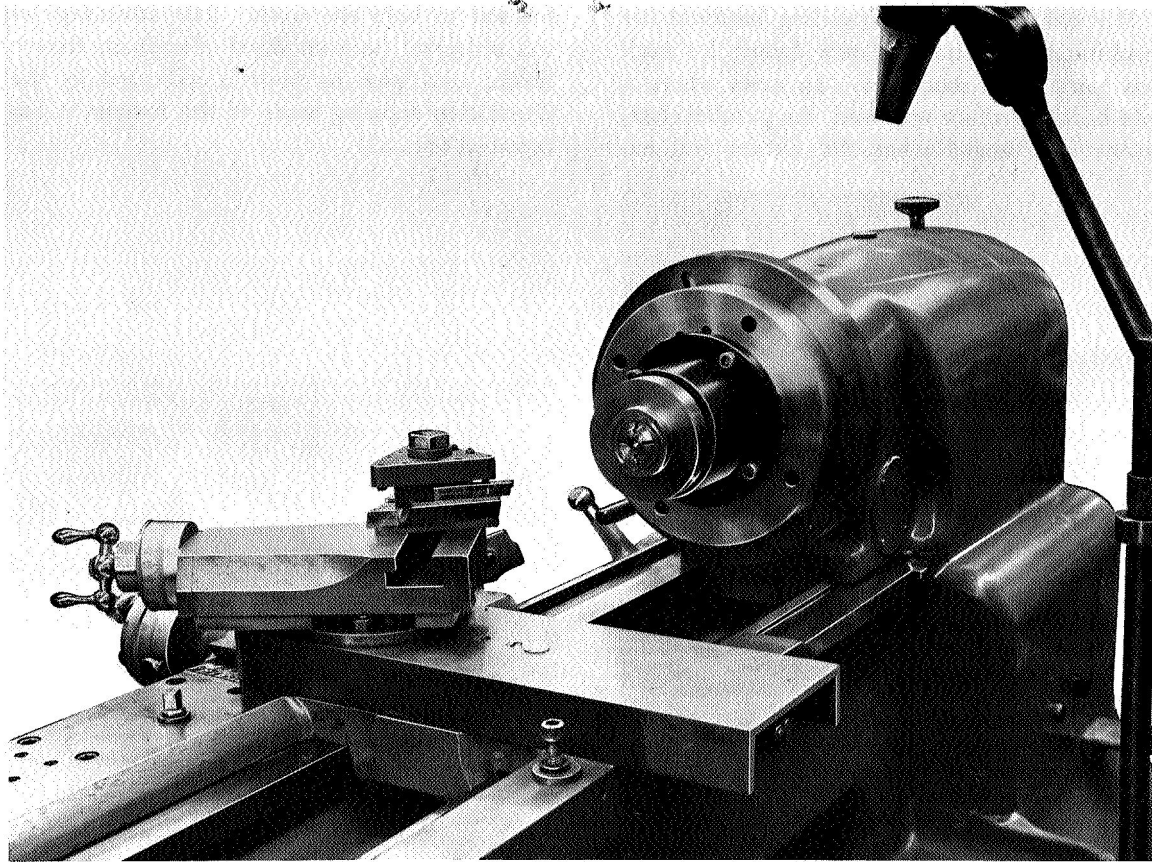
Lathe-mounted fixture holder with split-brass insert displaying tapered screw.
